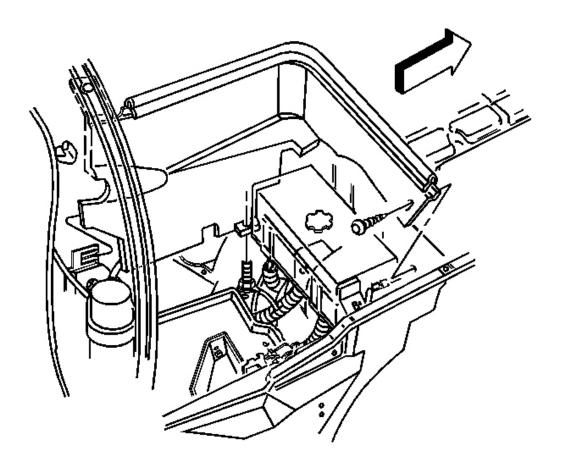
View Of Battery Heat Shield Courtesy of GENERAL MOTORS CORP.
